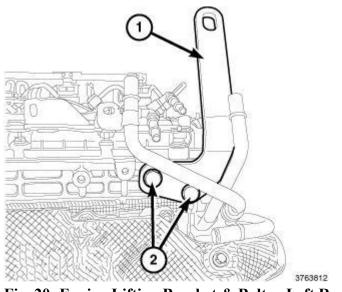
Engine Lifting Bracket & Bolts - Left Rear Courtesy of CHRYSLER GROUP, LLC
